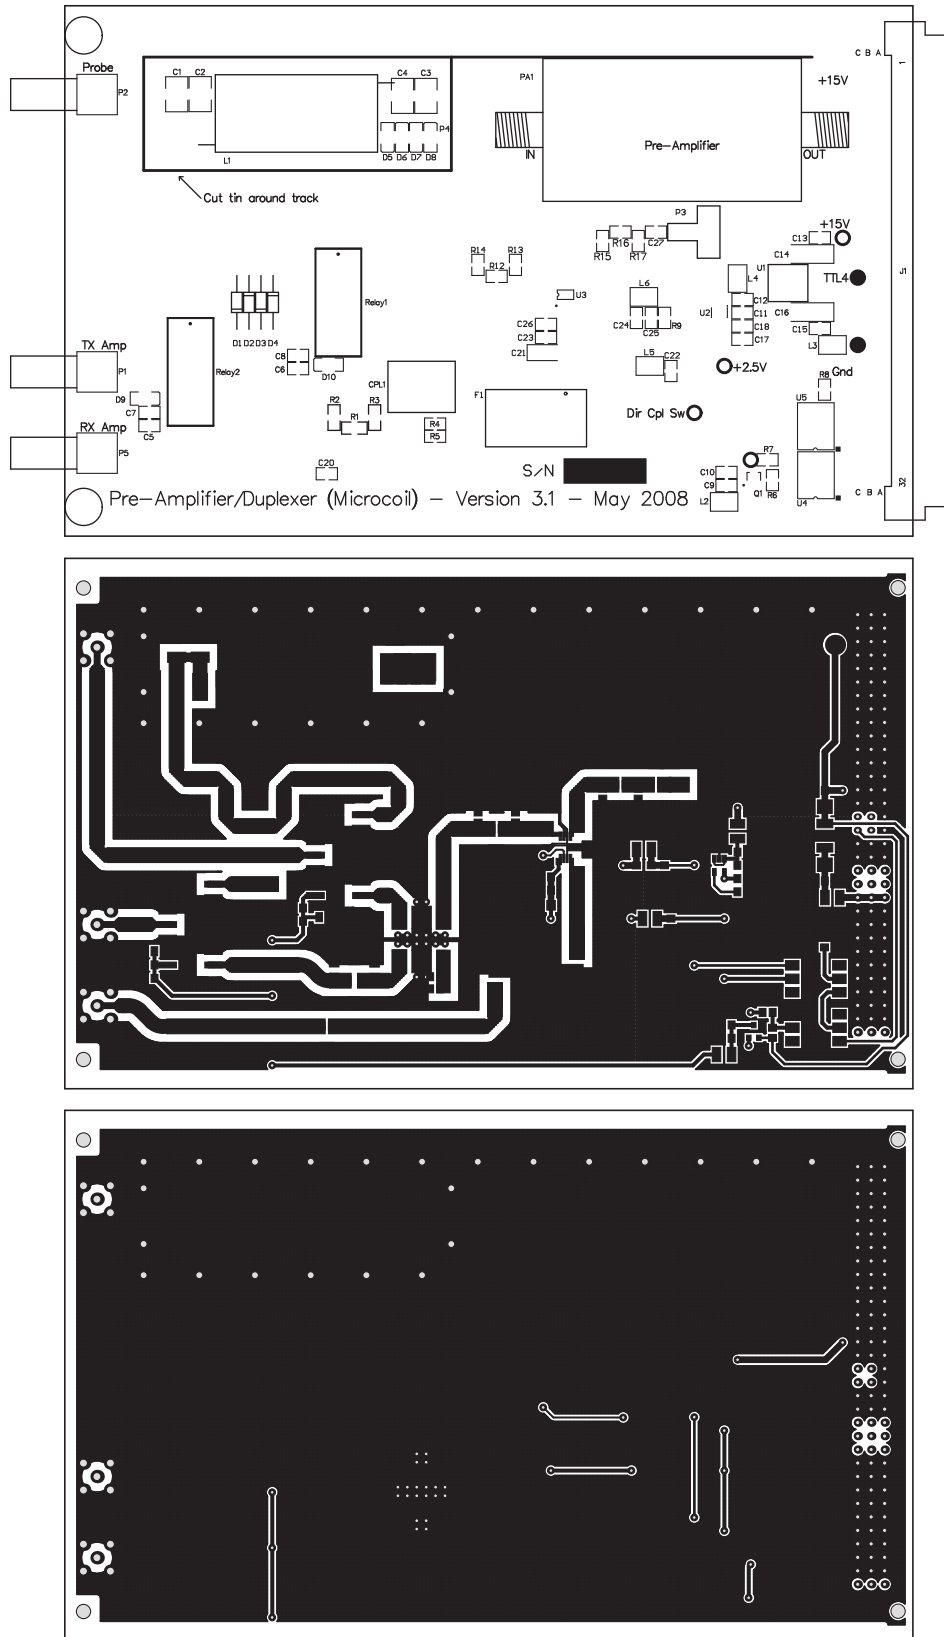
Pre-amp duplexer relay version PCB showing (in descending order) the top overlay, top layer copper, and bottom layer copper.
